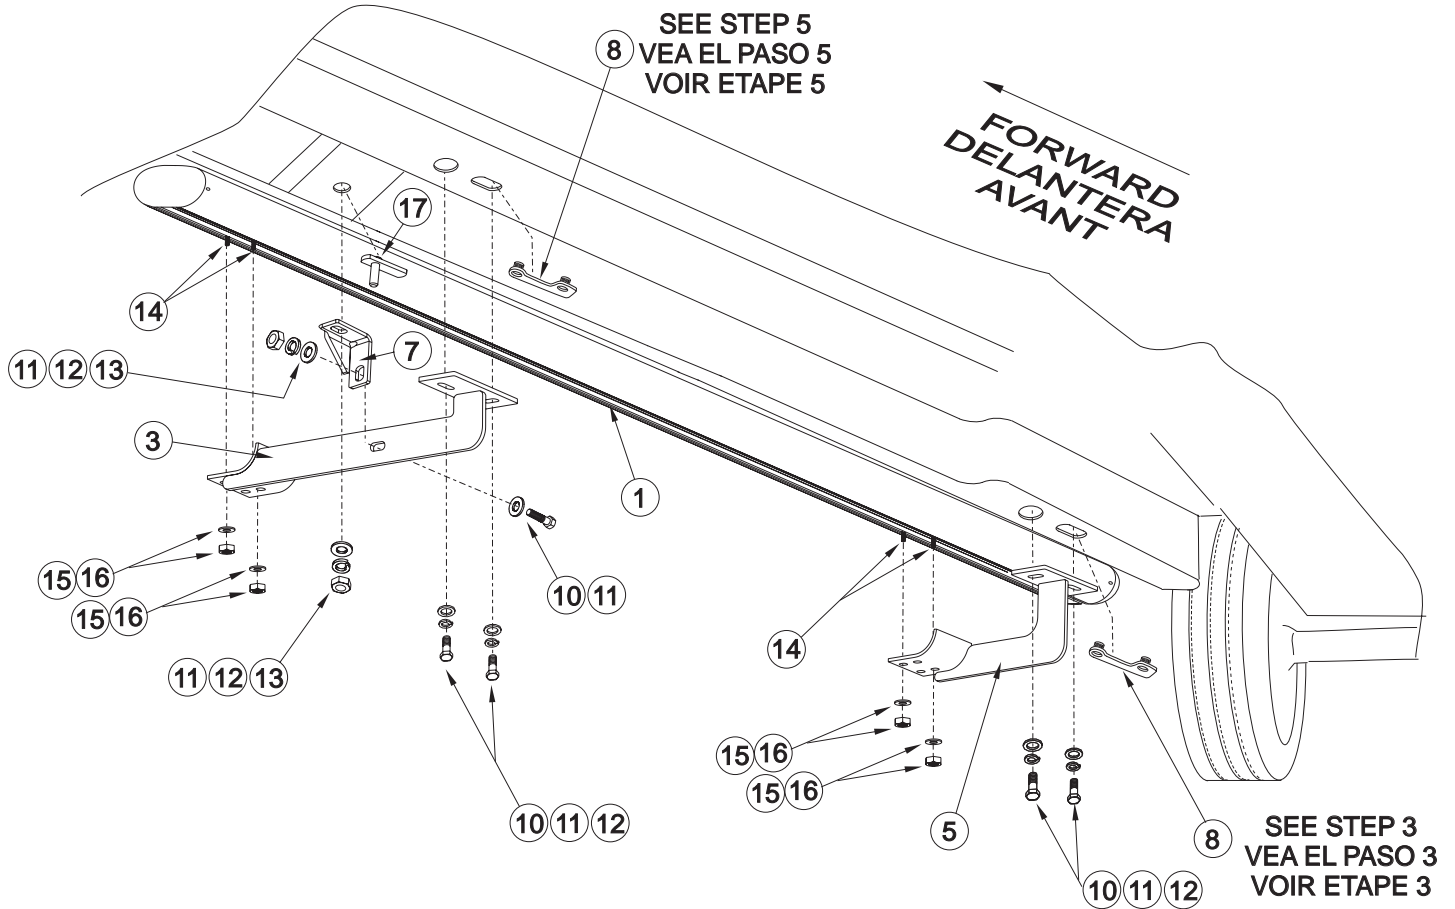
INSTALLATION VIEW OF PASSENGER SIDE SHOWN, DRIVER SIDE OPPOSITE
